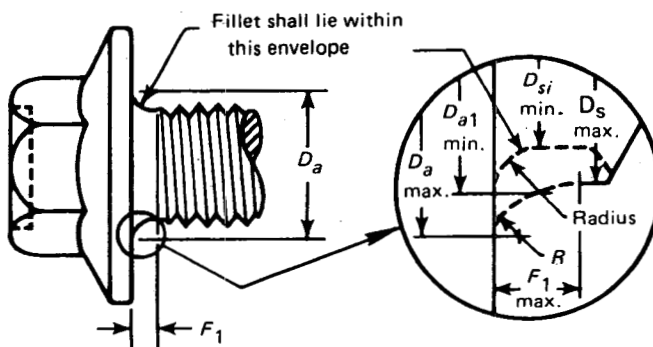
STYLE A FILLET DETAIL FOR SHORT SCREWS
